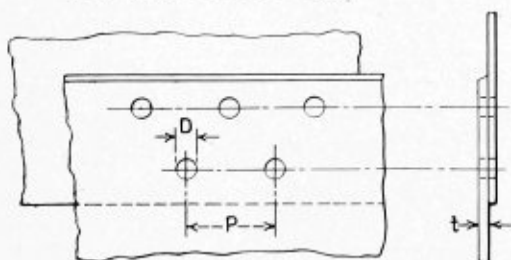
Double-riveted longitudinal or circumferential lap joint with staggered riveting
